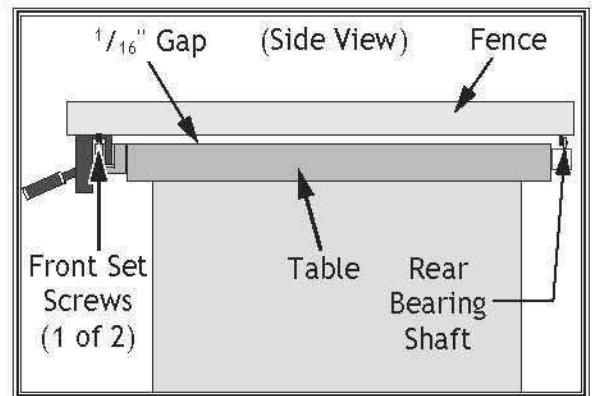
Fence height is adjusted by two front set screws and rear bearing shaft.
